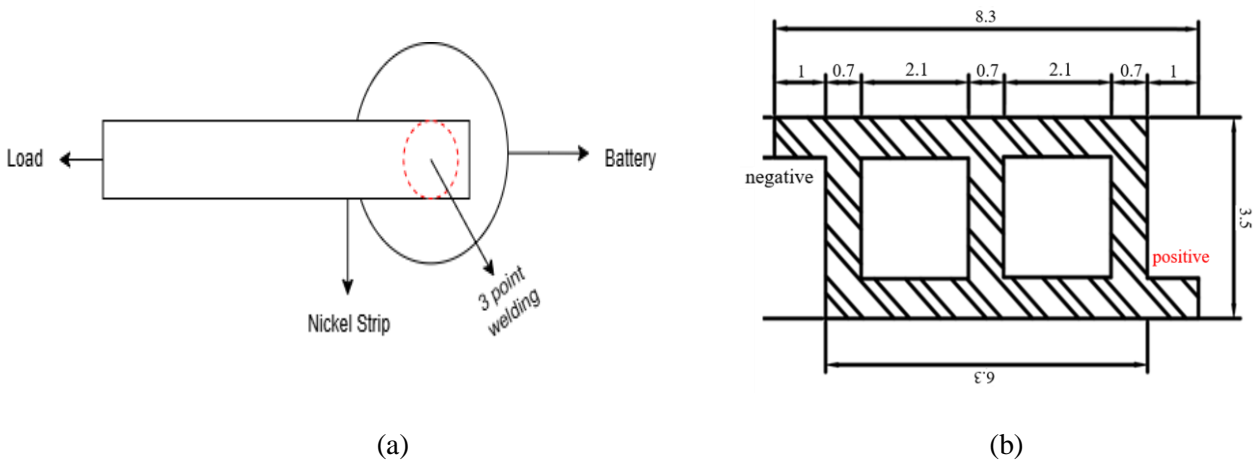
(a) Experiment setup welding, and (b) Experiment setup nickel
